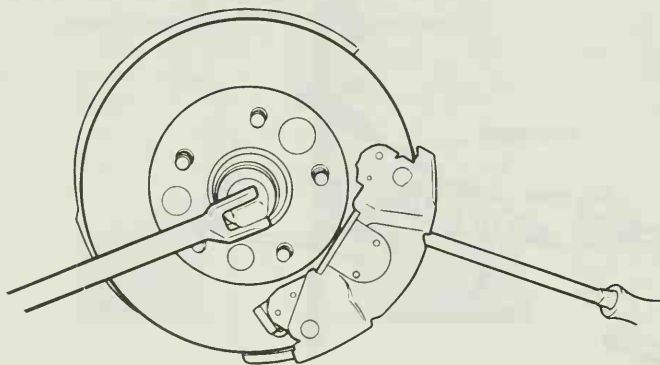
The rotor is held from turning as the hub nut is tightened. (Chevrolet Motor Division of General Motors Corporation)
